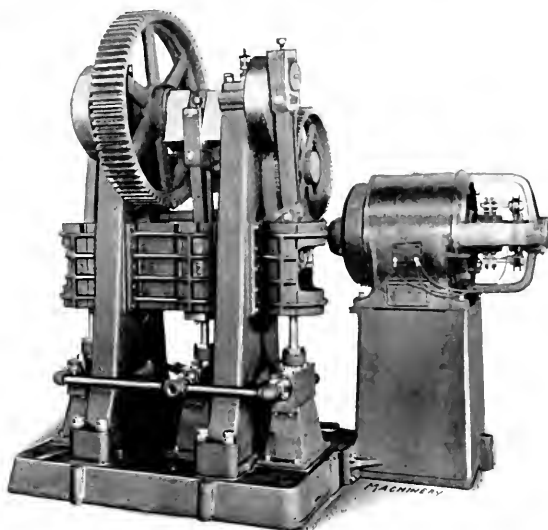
Front View of Improved Lees-Bradner Gear Hobber
